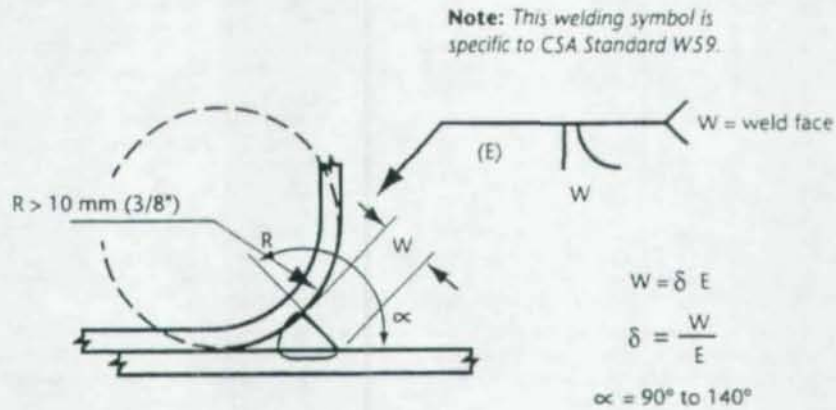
CSA W59 Pre-ballot Draft (Nov. 2001), Figure 5, Partial Joint Penetration Flare Bevel Groove Weld in a T-Joint (CSA, 2001)
